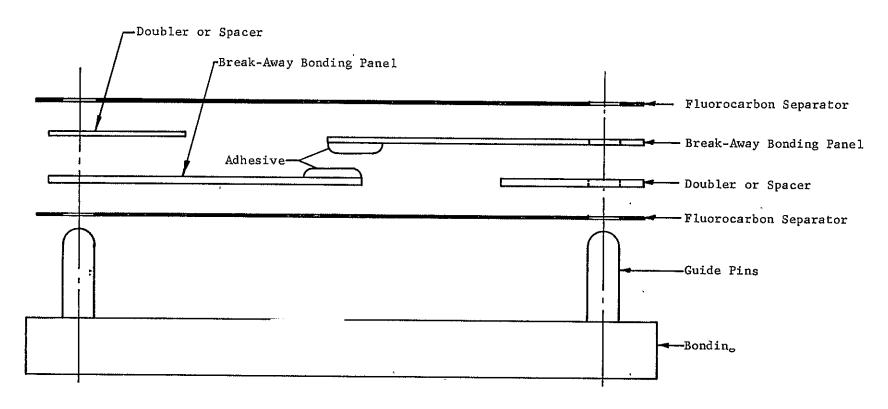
Exploded End View of Bonding Fixture, with One Complete Bonded Panel Assembly
